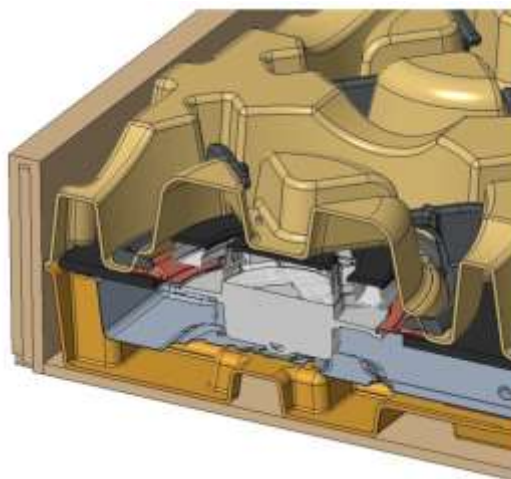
Cross-section-2 view of grill and top molded part.
